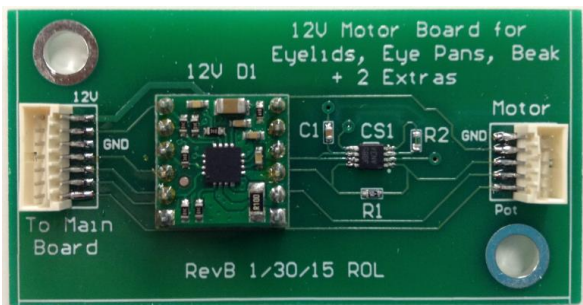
Assembled Eyelids, Eye Pans, Beak Board Revision B
